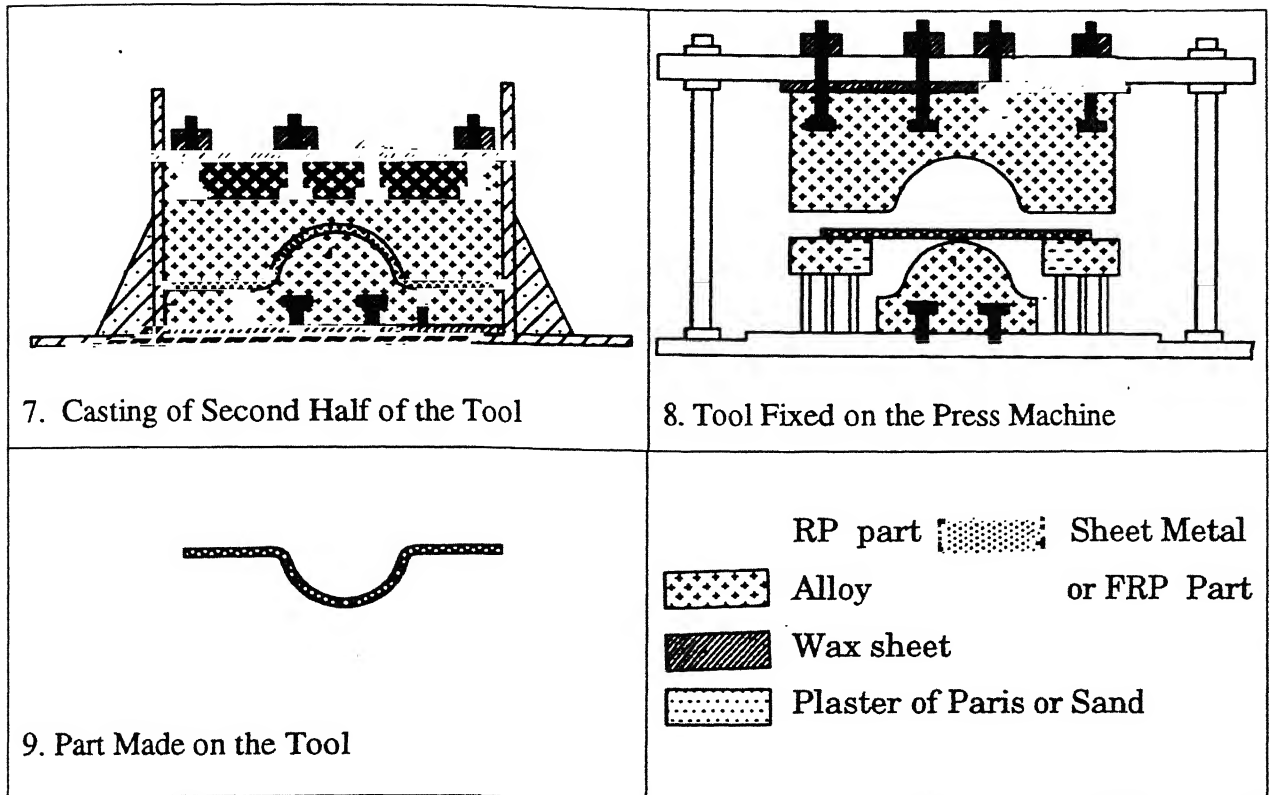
Process of making three-part Press-Tool Using Waxesheet
